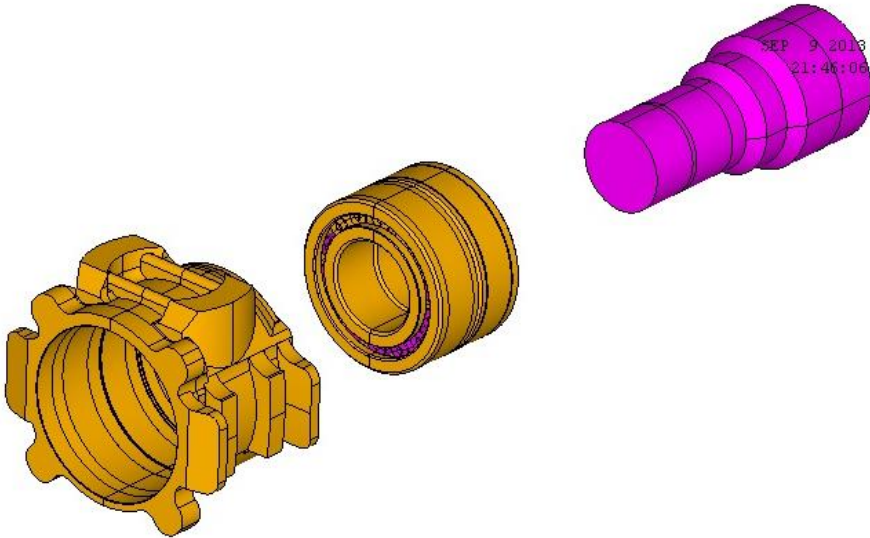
Elements of a geometric model of an axlebox bearing assembly with a double cylindrical bearing
